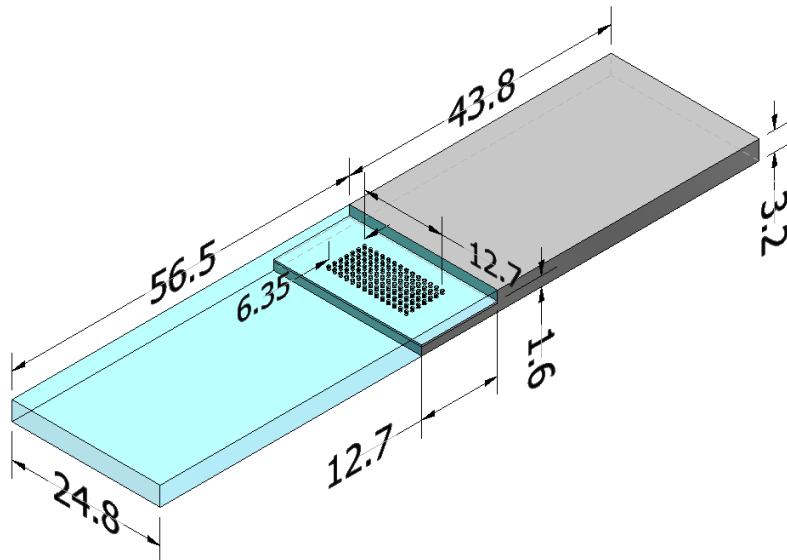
Geometry and dimensions of the injection overmolded PC/AISi10Mg hybrid joint specimens. AISi10Mg in light gray. Dimensions in millimeters (mm).
